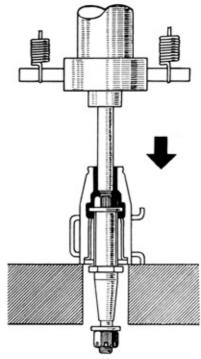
32 Pressing Out Lower Suspension Arm Shaft defective, replace bushing.
